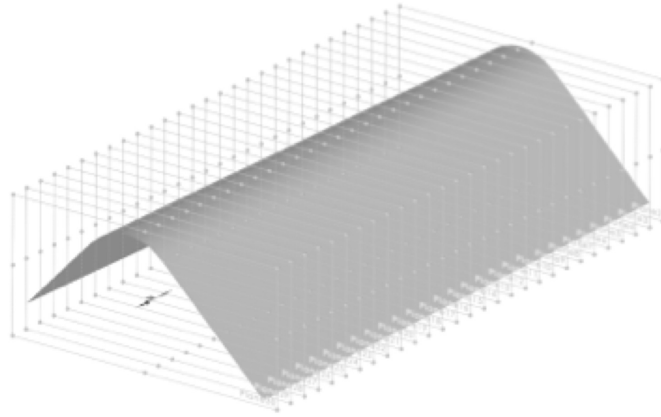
Measurement of angle in SolidWorksTM dividing the sample into 10 mm sections.
